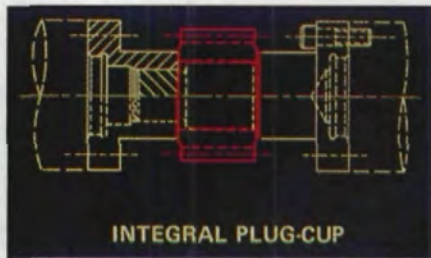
Integral tooling is another popular method of holding the workpiece.
